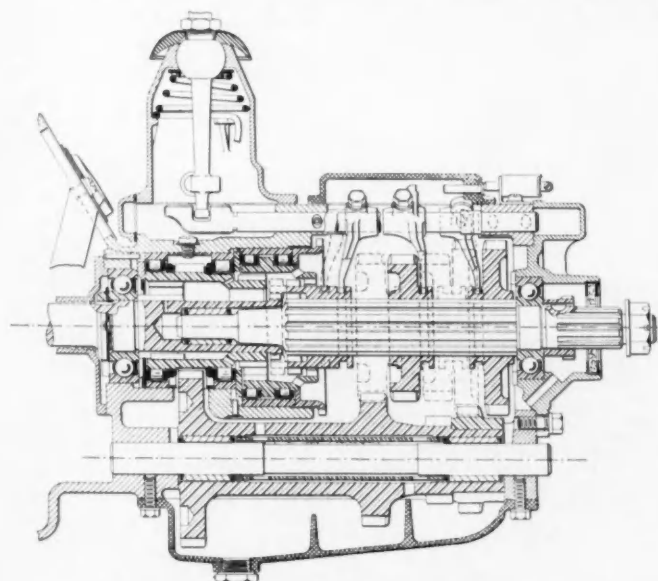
CHRYSLER FOUR-SPEED INTERNAL-GEAR TRANSMISSION
